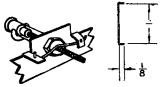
, left, shows the music wire spring applied to the adjusting screw.
